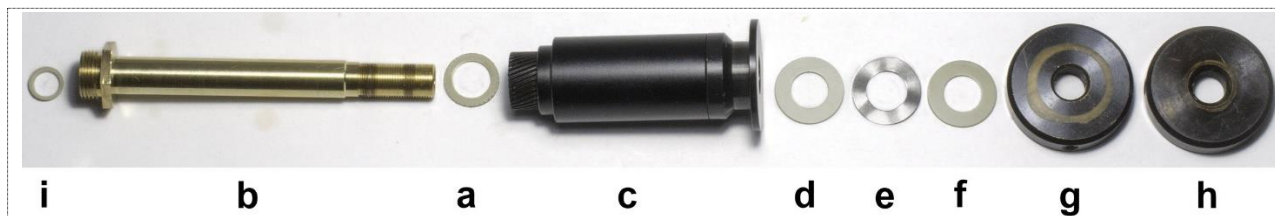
The y-axis control parts after disassembly. From the left to the right:
